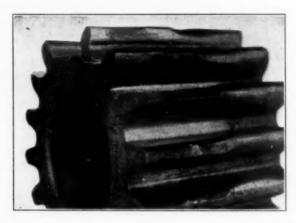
Three-Quarter View of Pinion Shown in Fig. 3, Showing Cracked Teeth
